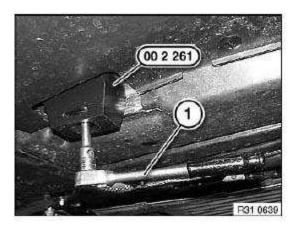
Identifying Special Tool 00 2 261 Courtesy of BMW OF NORTH AMERICA, INC.
